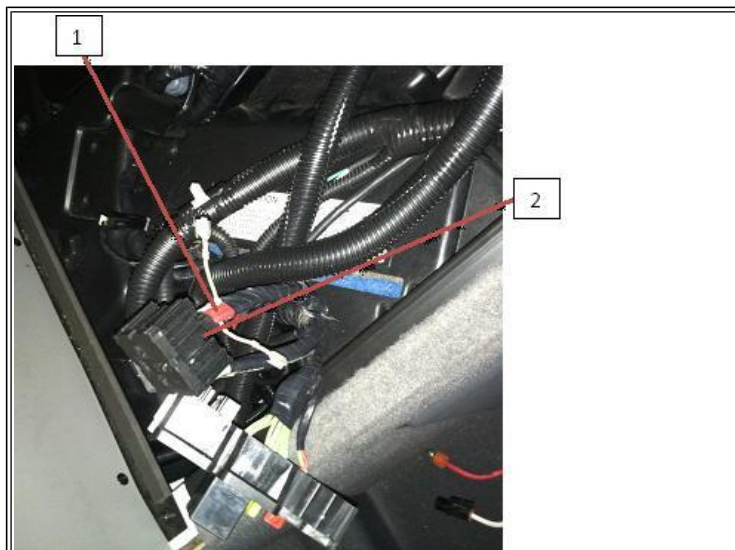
Control Center Assembly Harness 4-Pin Connector.
